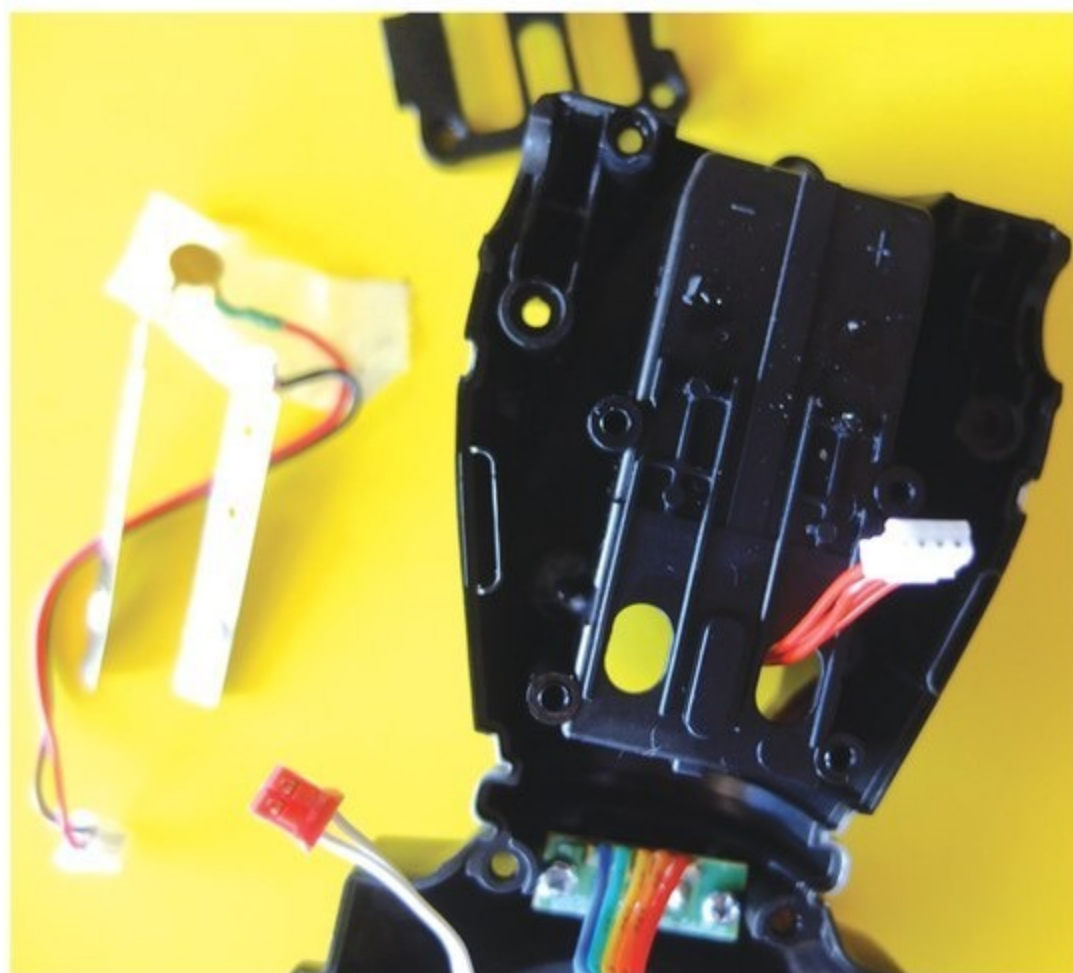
Remove the battery pack terminal strips for routing the expansion cable.
